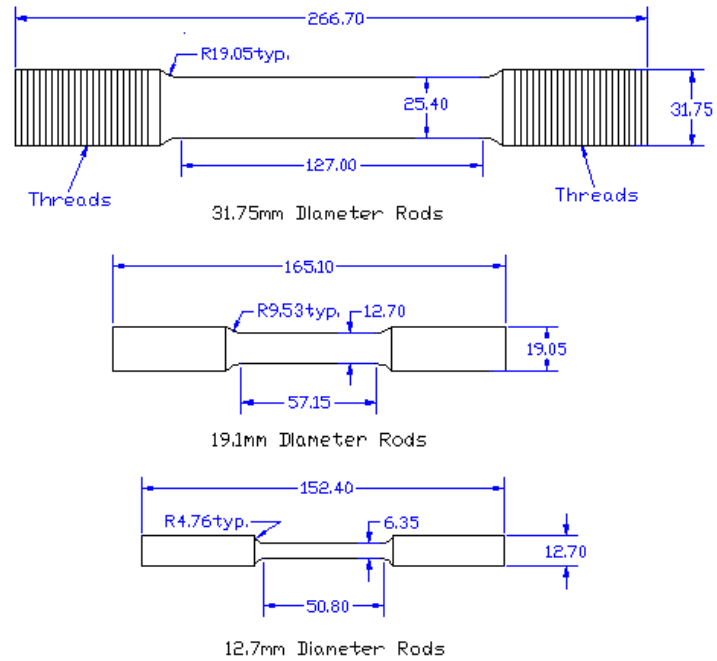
Drawings of the full-scale bar specimens with dimensions labeled in mm.
